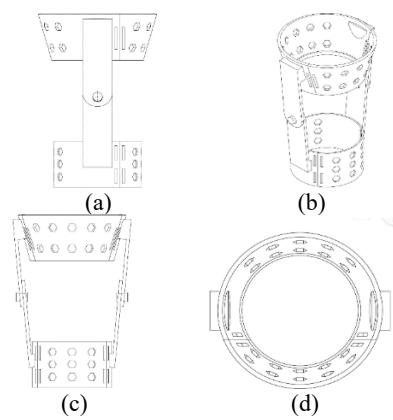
(a) Side view (b) Isometric view (c) Front view (d) Top view
